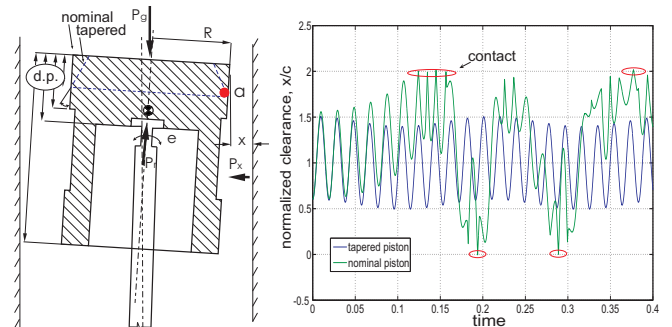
Schematic drawing of piston and results of secondary piston motion simulations
